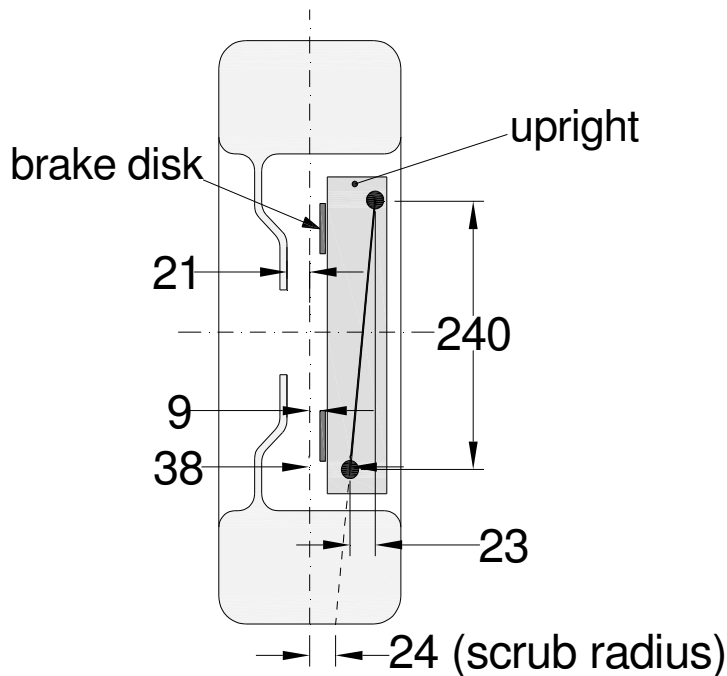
Front wheel in front view with king pin inclination and scrub radius
